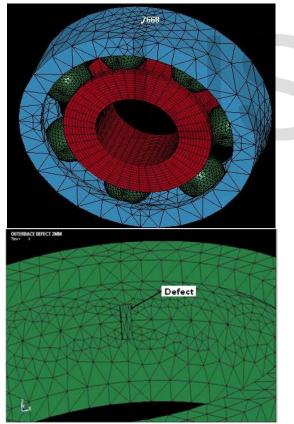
a) Meshed model of bearing with outer ring defect b) Defect on outer ring of Bearing
